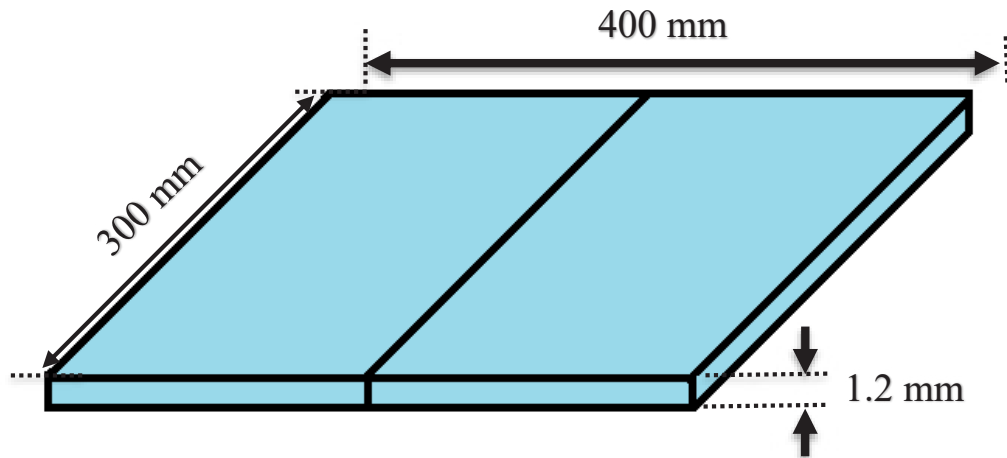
Schematic of Butt-welding joints (mm).
